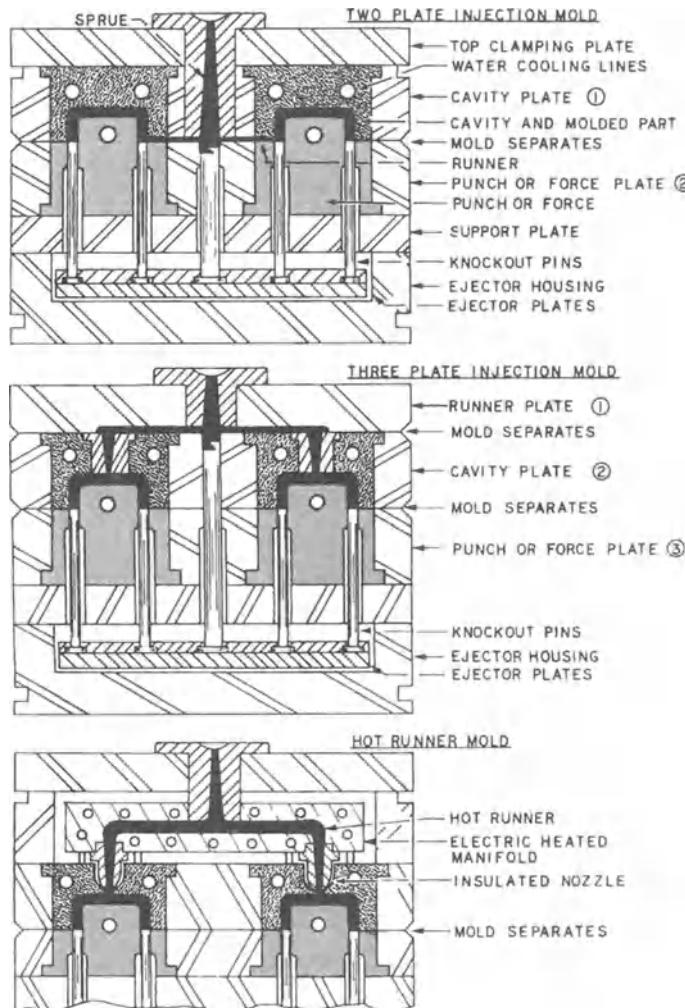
Types of molds, illustrating cold-runner two-plate, cold-runner three-plate, and hot-runner mold for thermoplastics.
